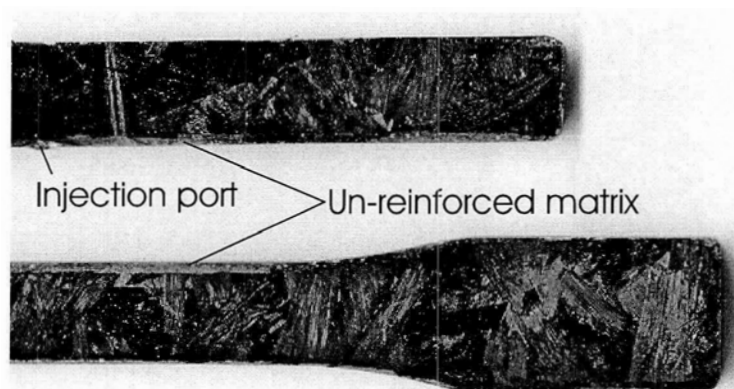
Molded Test Coupons: Flexure (top) and Tensile (Bottom)
